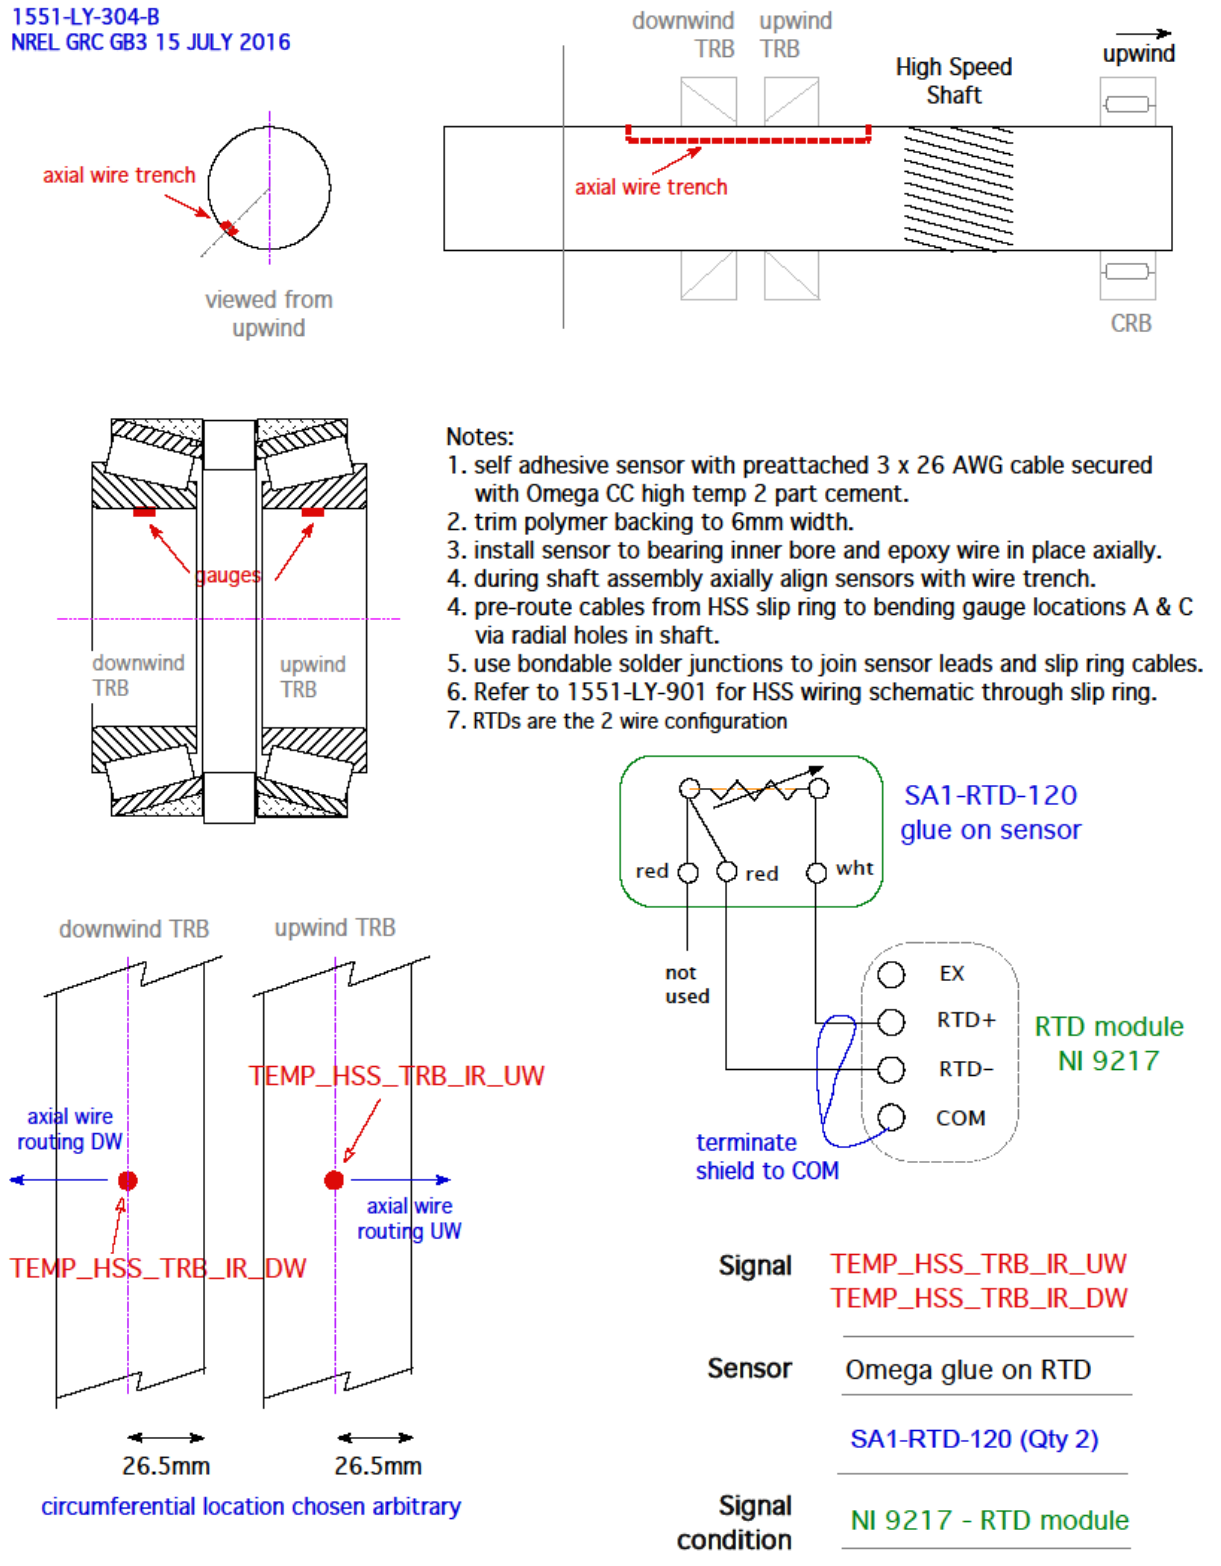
High-speed shaft bearing inner ring temperature. Illustration by Romax Technology
